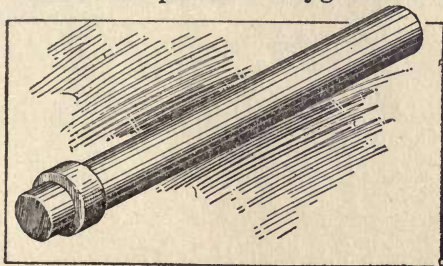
This piston-pin bushing driver is turned out of a solid piece of steel.
